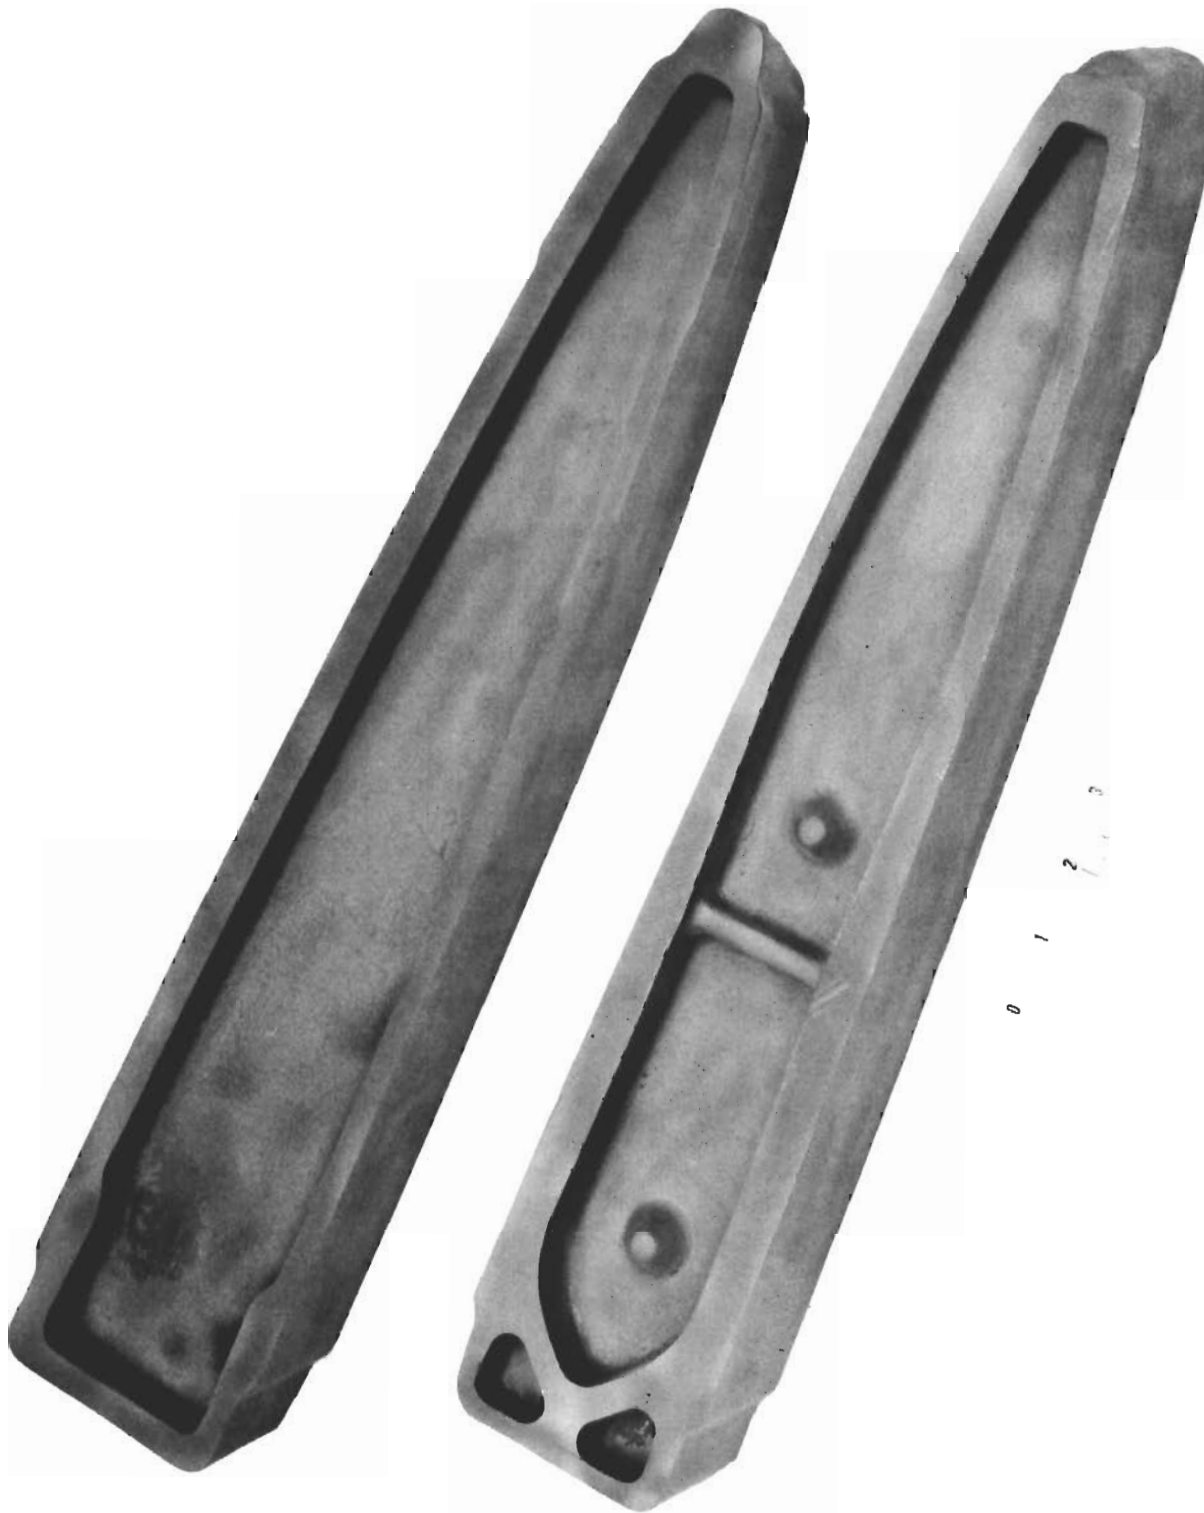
Both Sides of Ti 6Al-4V Finish Forging Produced with 6000 Ton Hydraulic Press. Shown after "Trimming" by Milling Excess Rib Heights. Note Detailed Triangular Impressions at Blunt End of Lower Die Side. Tooling Failed in This Area after Very Few Forgings were Produced - See Text.
